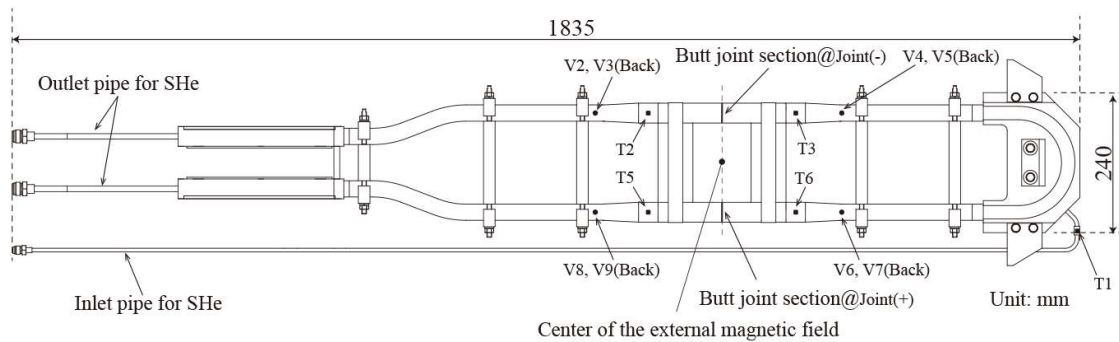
Schematic view of the pancake joint sample for the CS coil.
